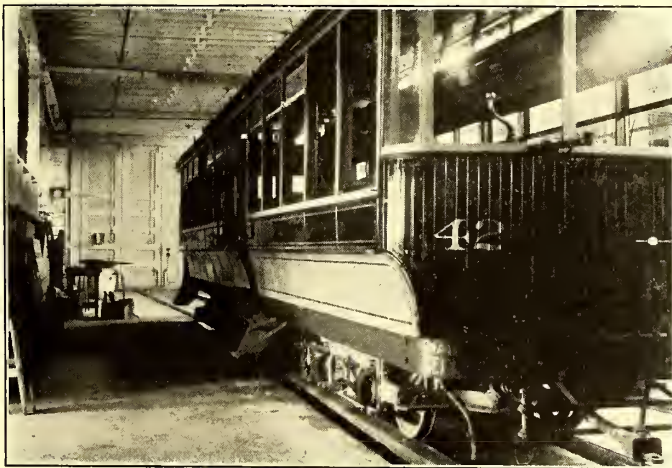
A PART OF DENVER PAINT SHOP, SHOWING TROUGH HOLLOWED OUT IN CONCRETE FLOOR BELOW THE CAR SILL
